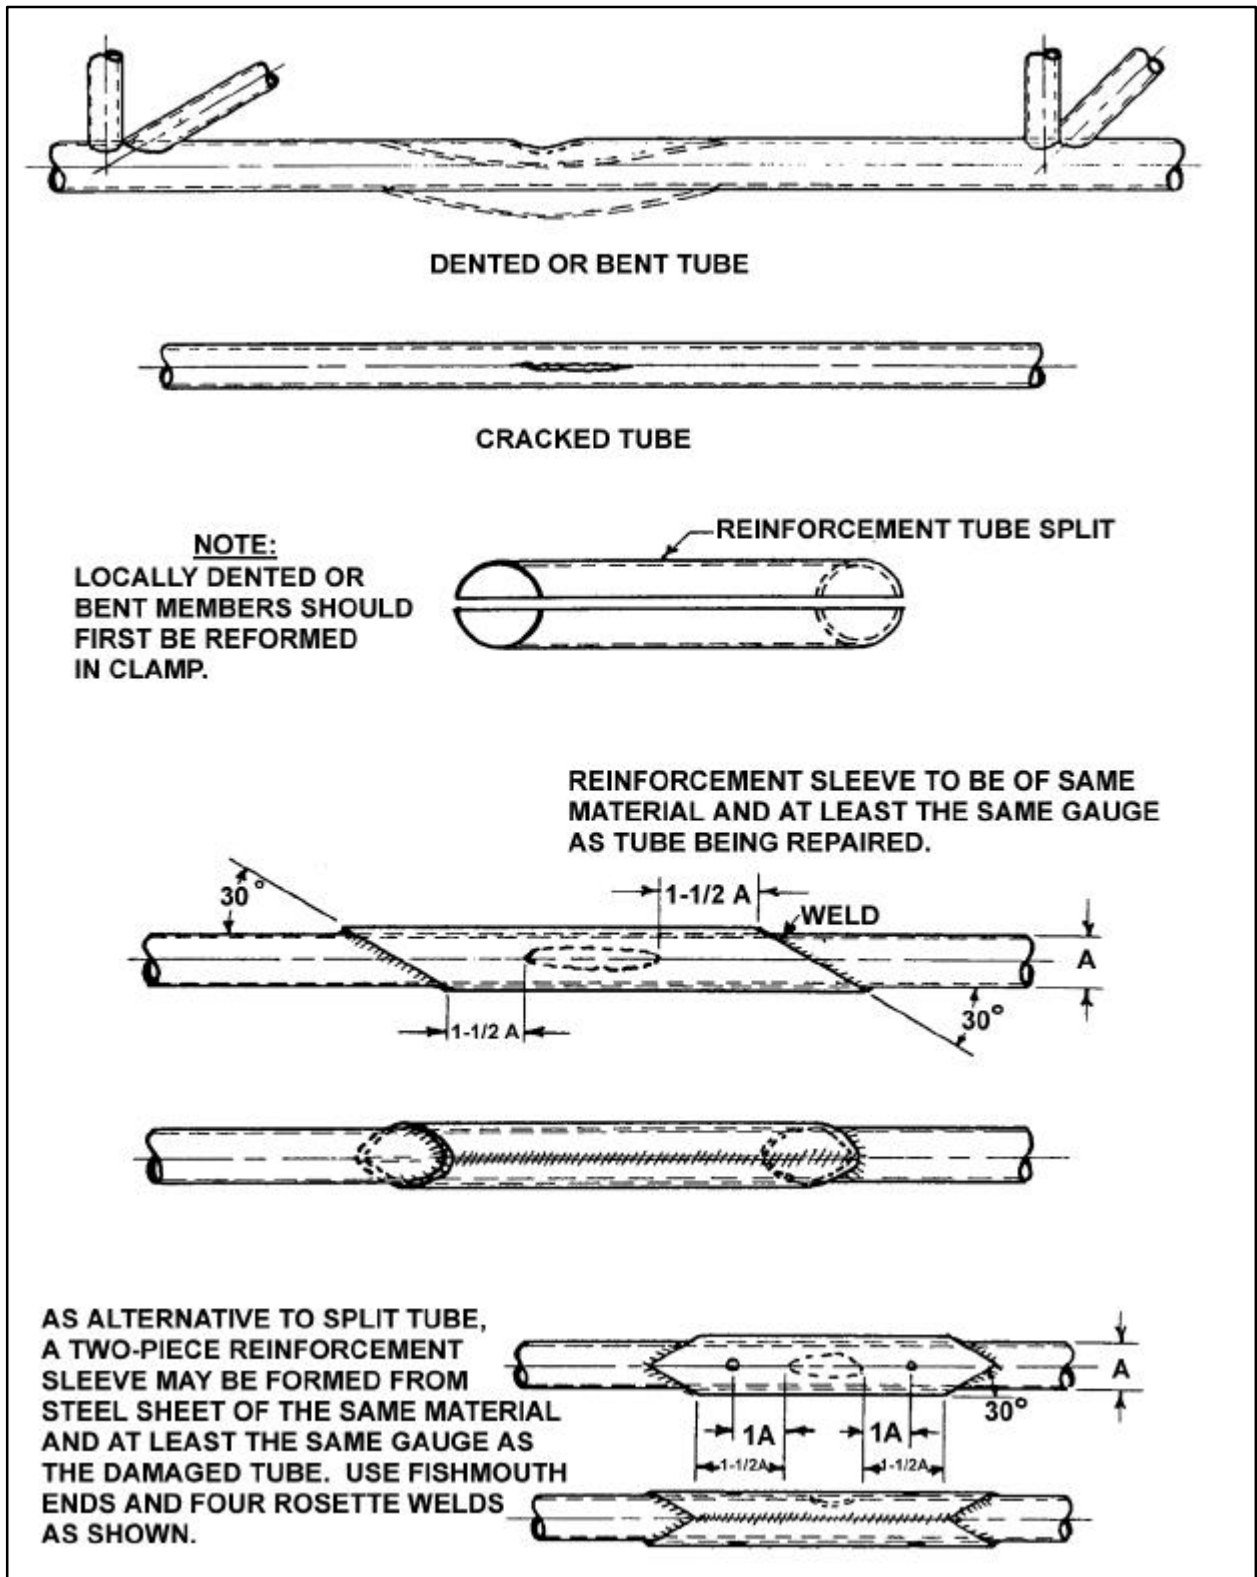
Members dented in a bay (repairs by welded sleeve).
